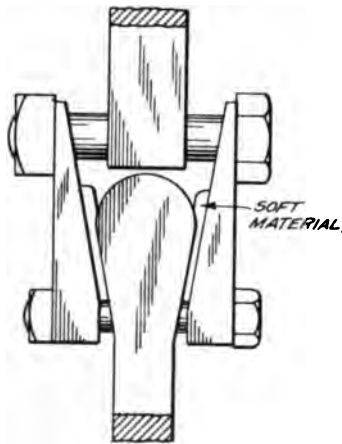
GRIP USED IN TENSION TESTS OF RECTANGULAR RODS
